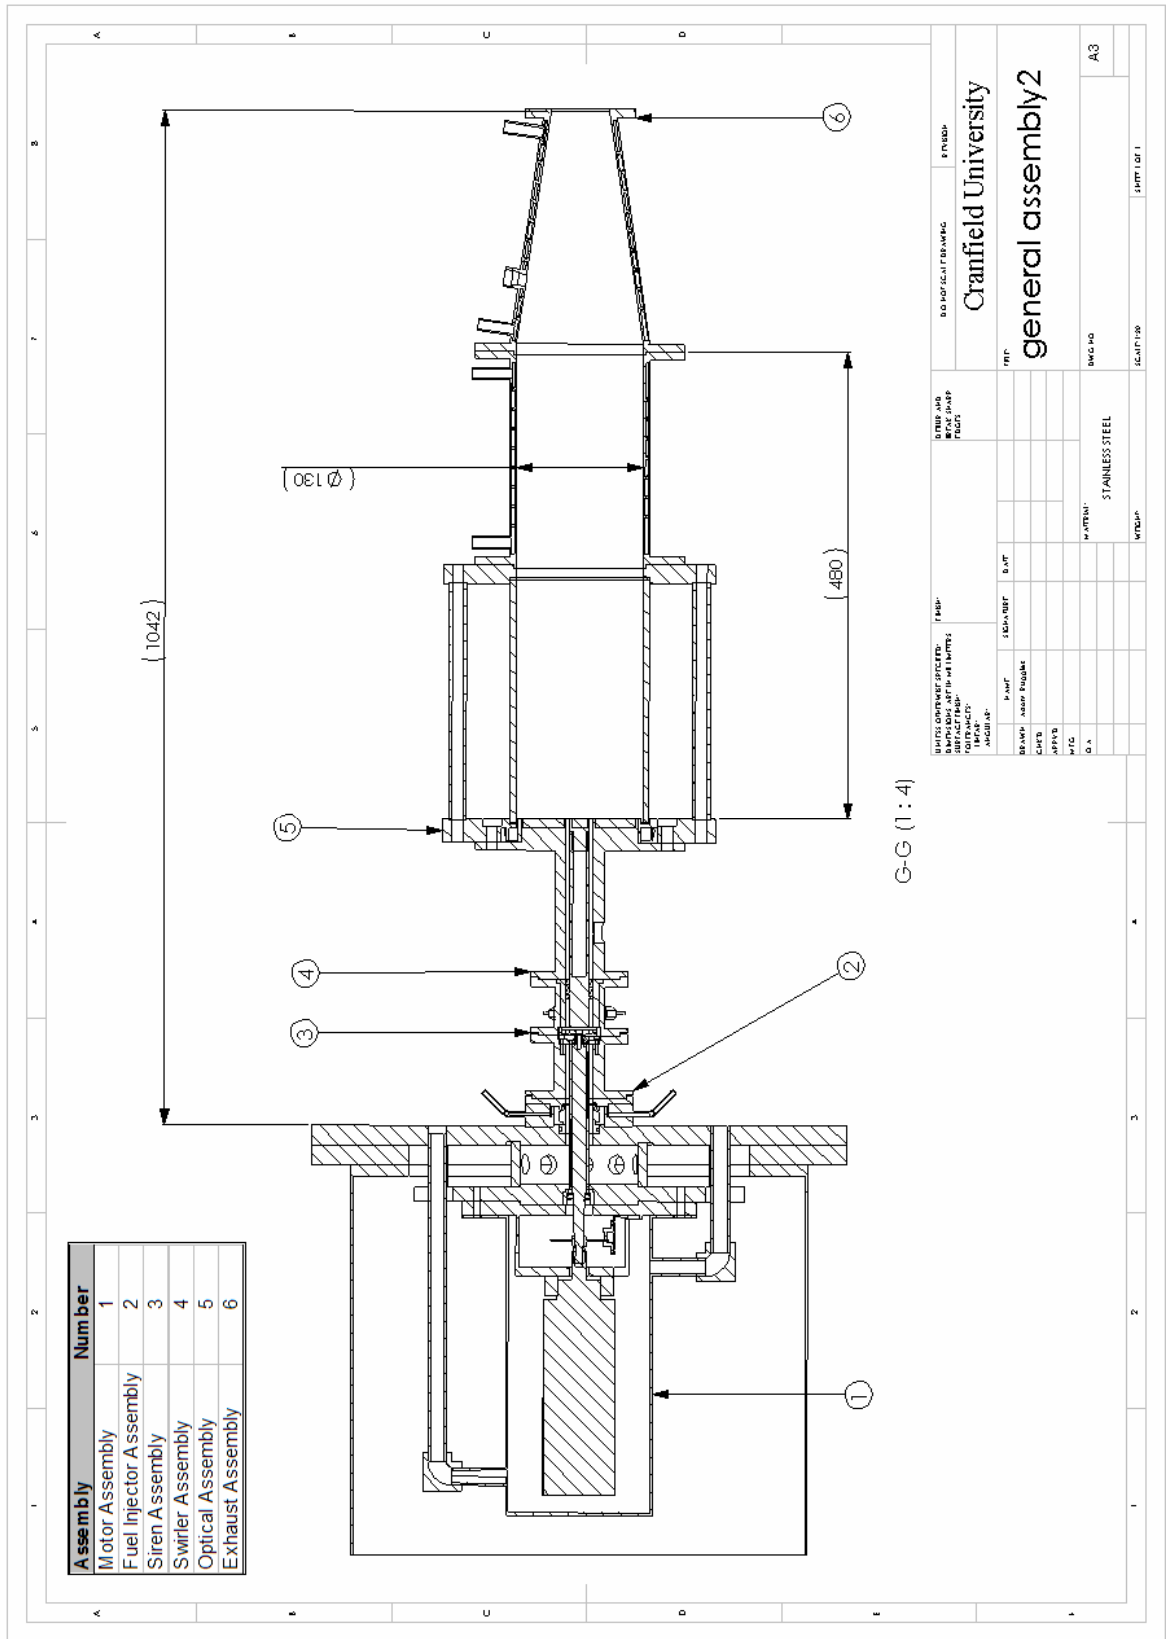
General Assembly drawing showing combustion chamber fully assembled.
